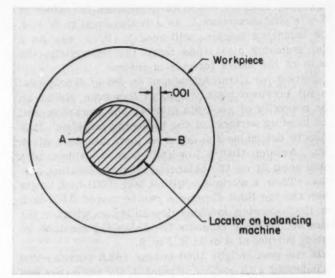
Workpiece with clearance in bore introduces error which must be taken into consideration
